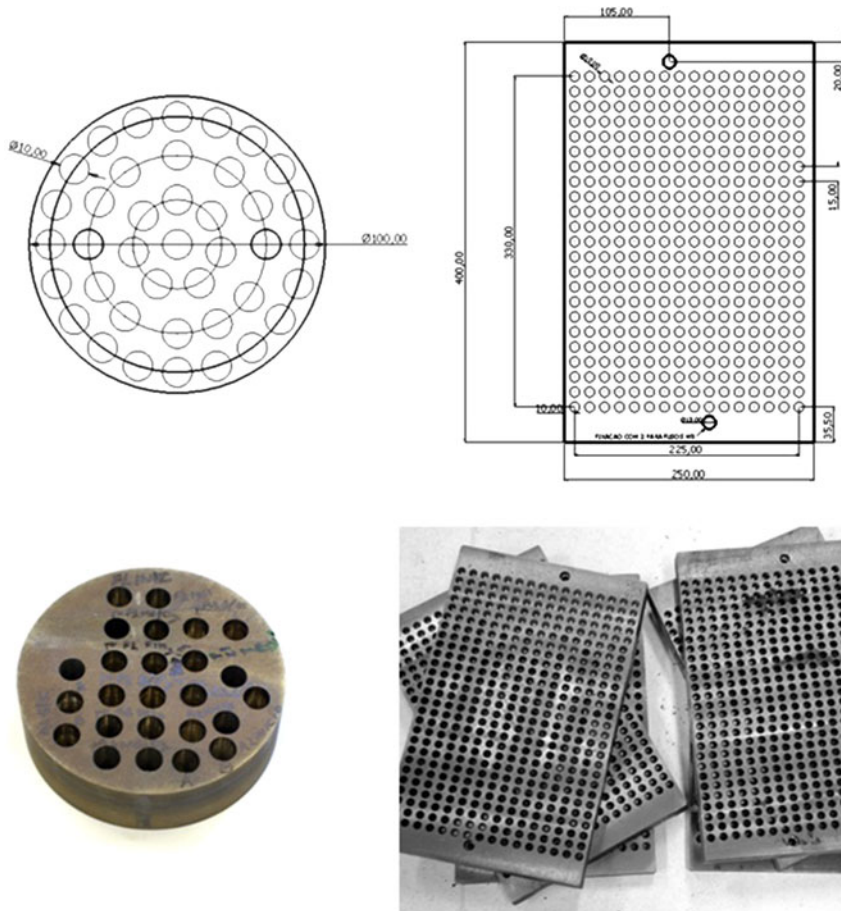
Compacted graphite iron specimens' dimensions (in mm)
